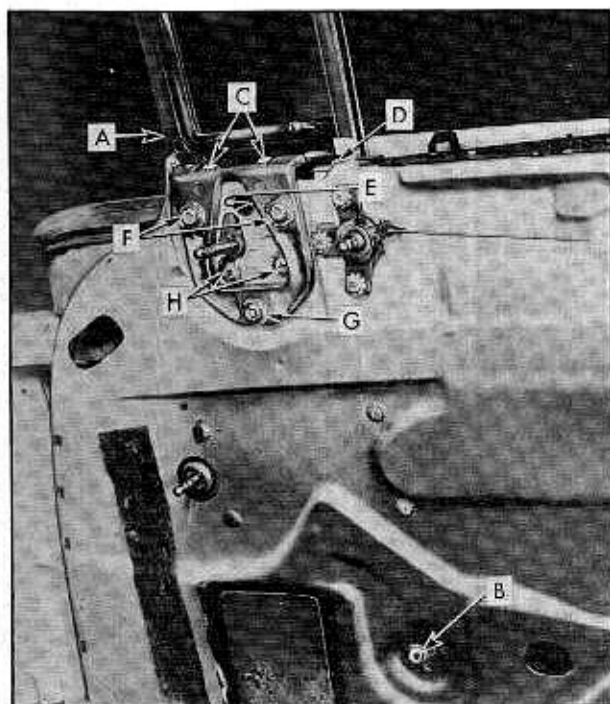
Ventilator Assembly Adjustment (6237)
